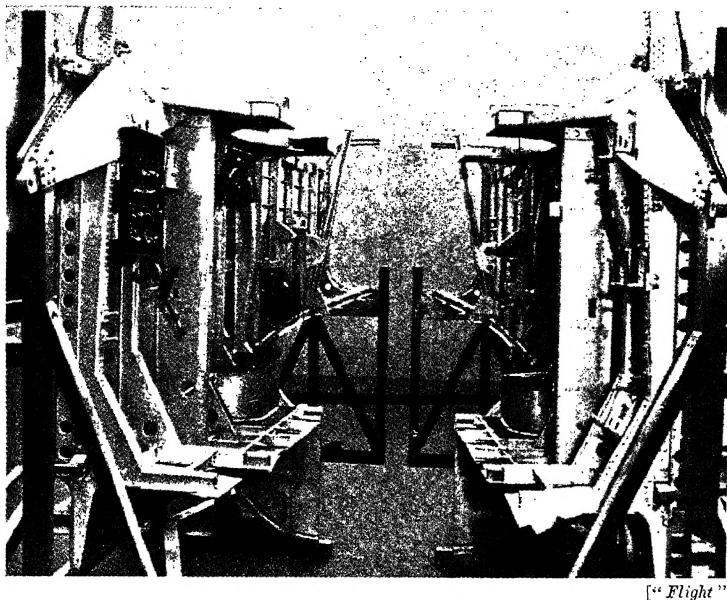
SHOWING EQUIPMENT INSTALLED AND THE TWO HALVES READY FOR JOINING UP.
